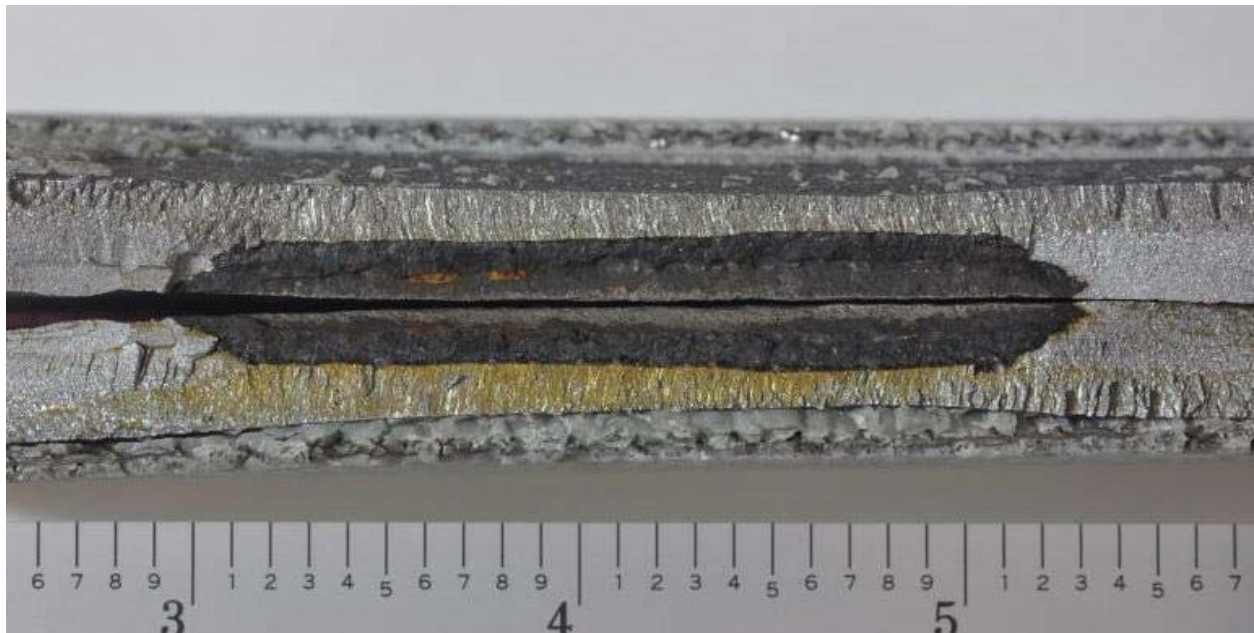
Post Flaw Inspection of EDM notch in Reinforced Sample (Failure Occurred outside Reinforcement)
